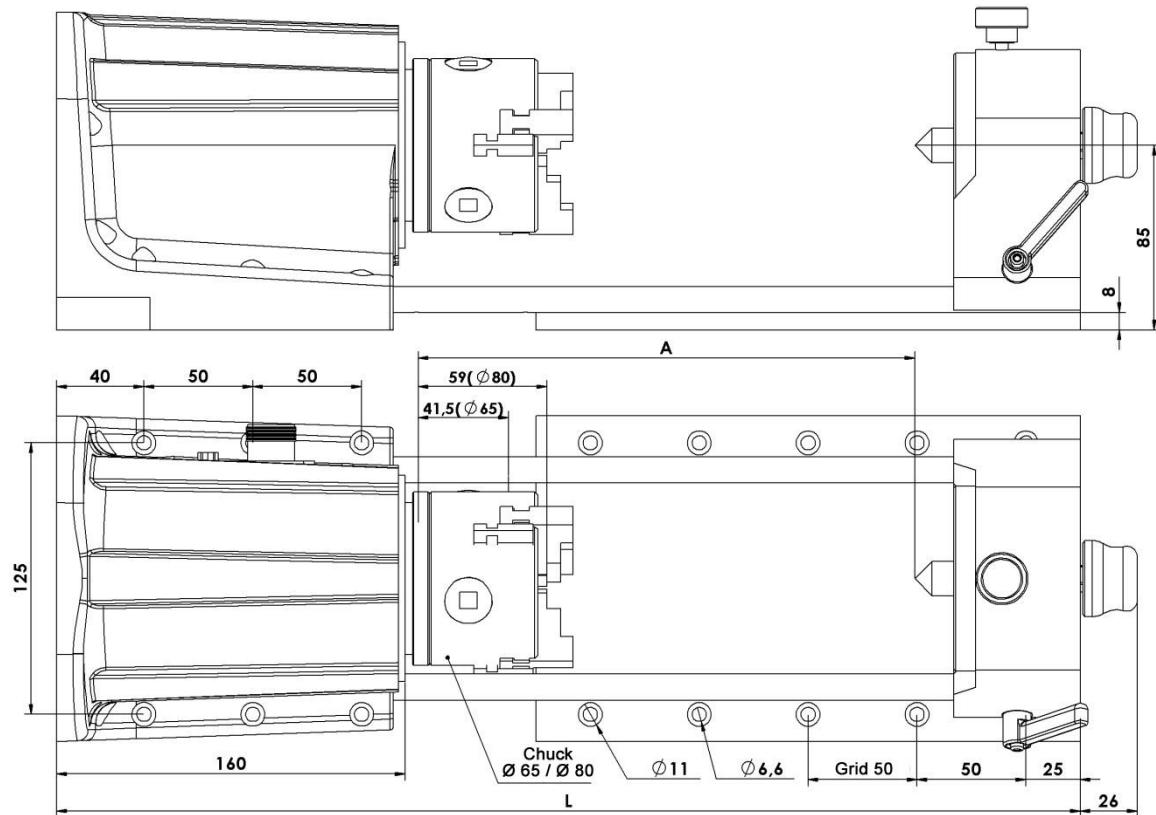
Dimension drawing rotation unit RDH-S with tailstock unit RE S
